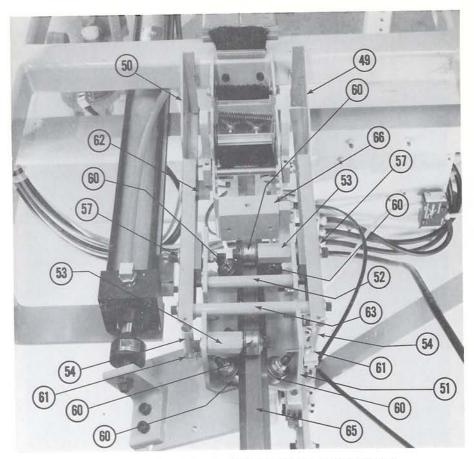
UNDER CARRIAGE ASSEMBLY
